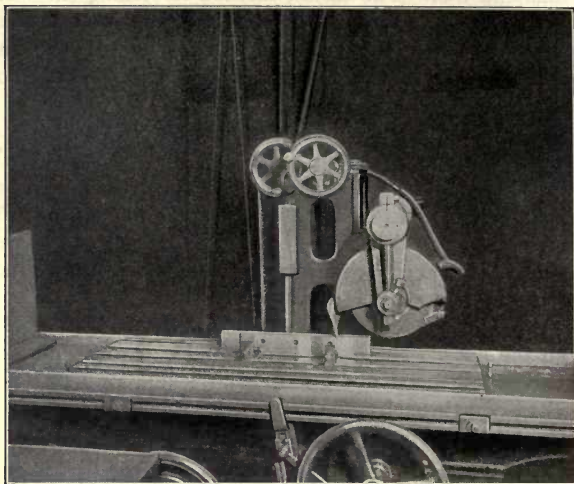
Surface-grinding machine having provision for wet grinding.
